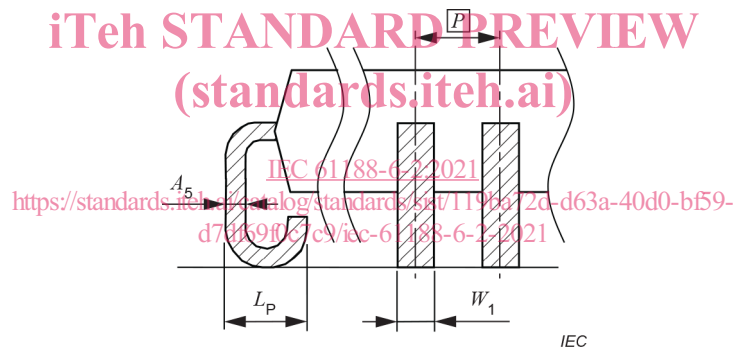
Definitions of dimensions of the flat bottom terminal types
